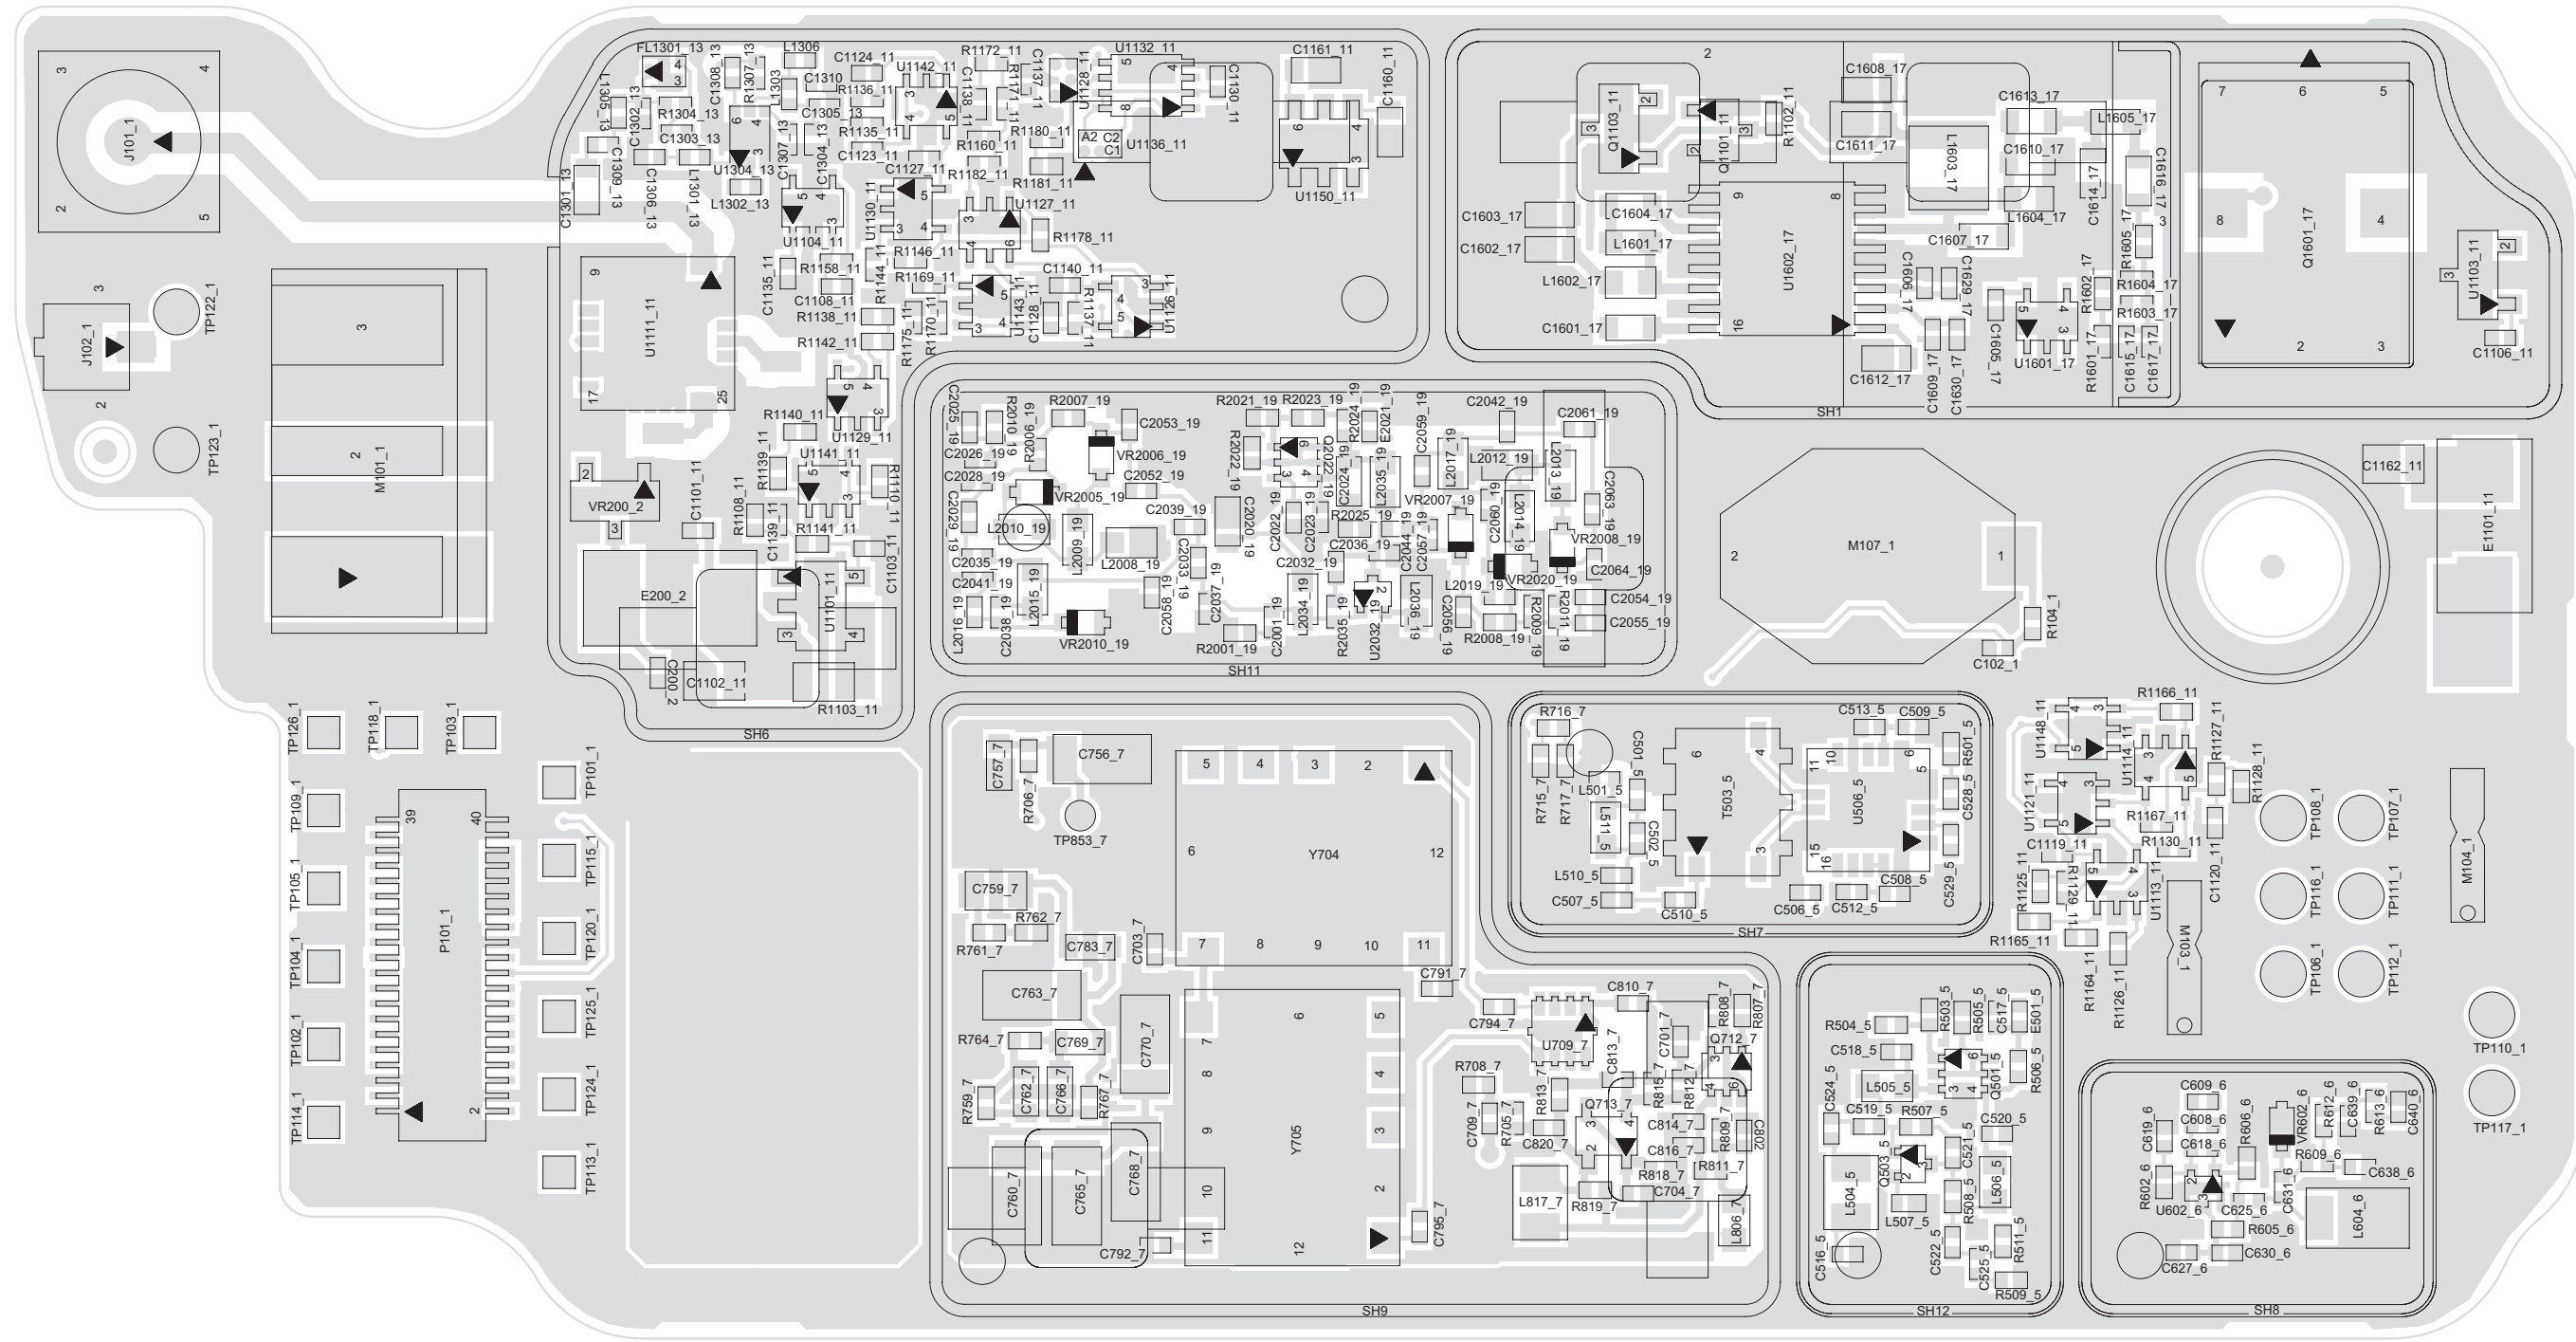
NUE7365A Transceiver (RF) Board Layout – Side 2
